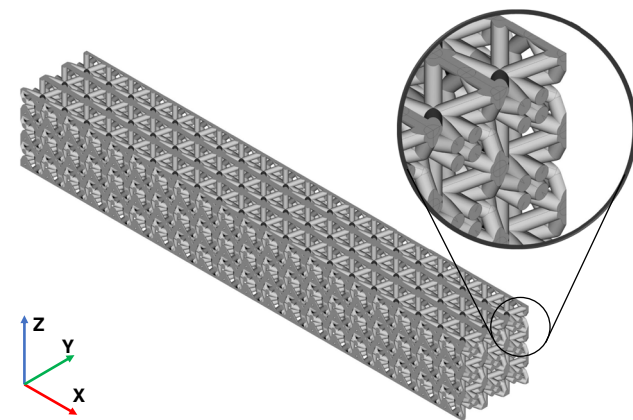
3D-printed demonstrator of the lattice assembly.
